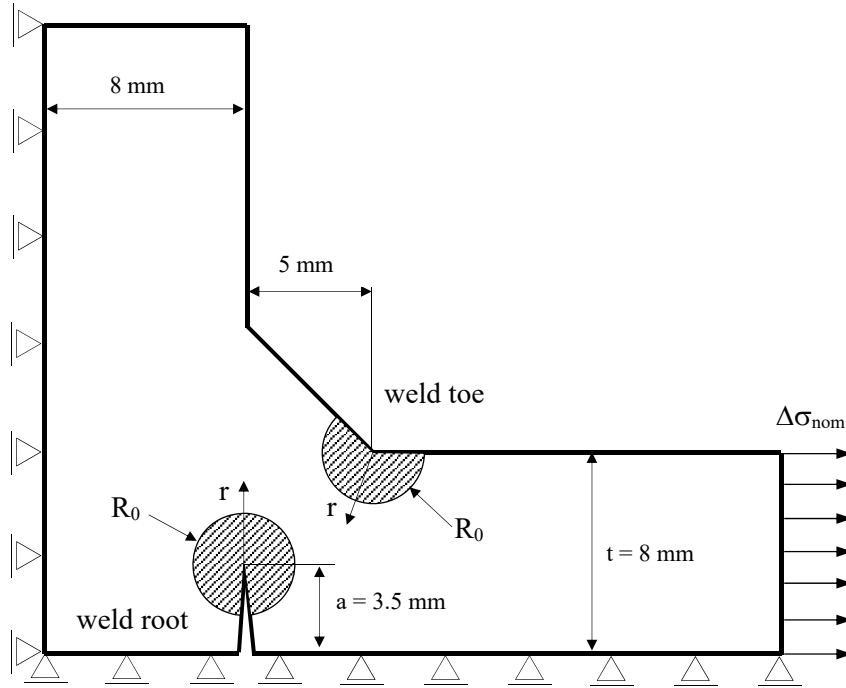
Geometry of the load-carrying steel weld joint tested in³¹. Control volumes for the averaged SED evaluation at the weld toe and the weld root sides.
